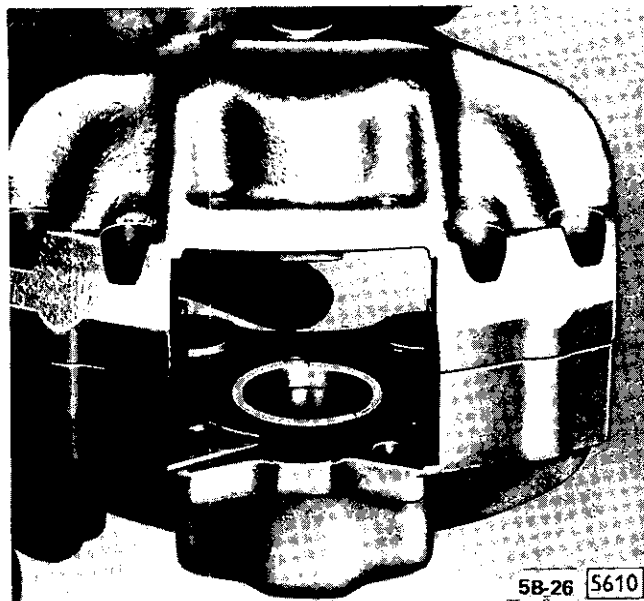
B-26 Removing or Installing Rubber Seal Clamp Ring
